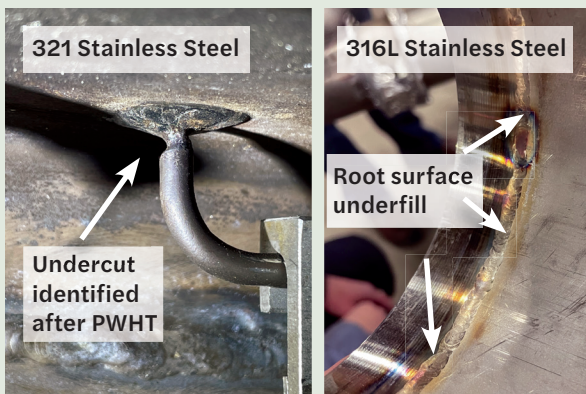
VT weld discontinuities as inspected during a welding shop walkdown inspection.
